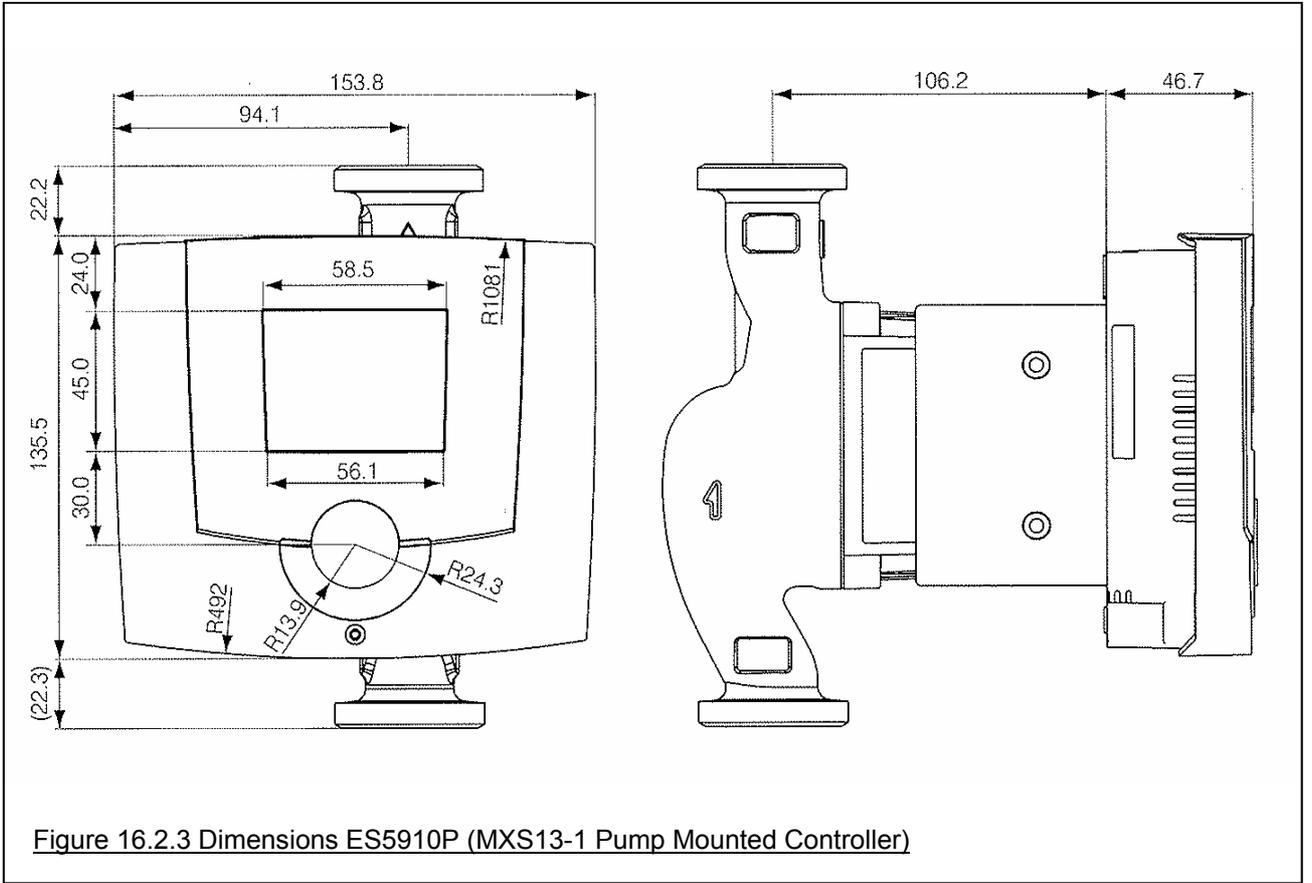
Dimensions ES5910P (MXS13-1 Pump Mounted Controller)
